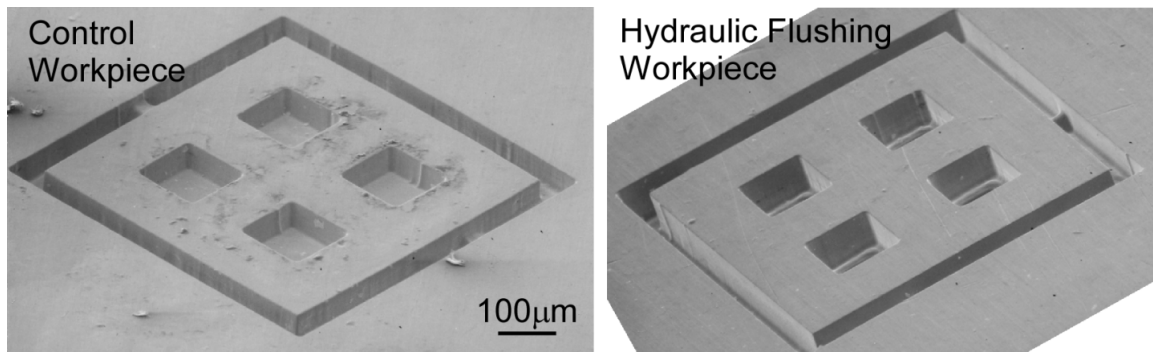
Workpiece after machining for Left: regular flushing had debris fused to the surface and Right: hydraulic flushing had very clean, sharp surfaces.
